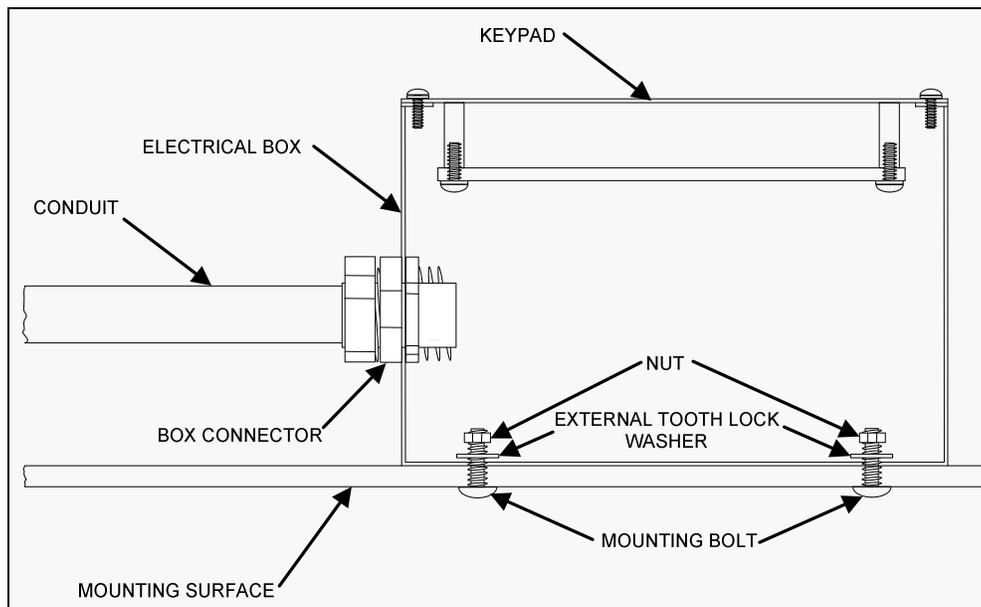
Keypad 314 Rubber/Metal Surface Bonding Example
